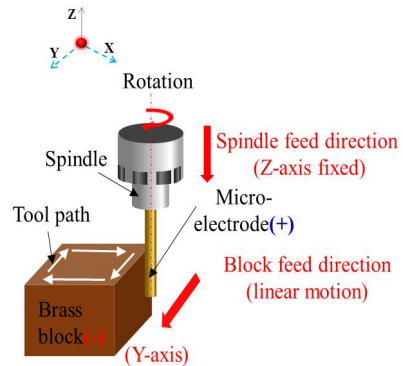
Conventional machining method for micro-electrode in micro-electrical discharge machining process^[11]
